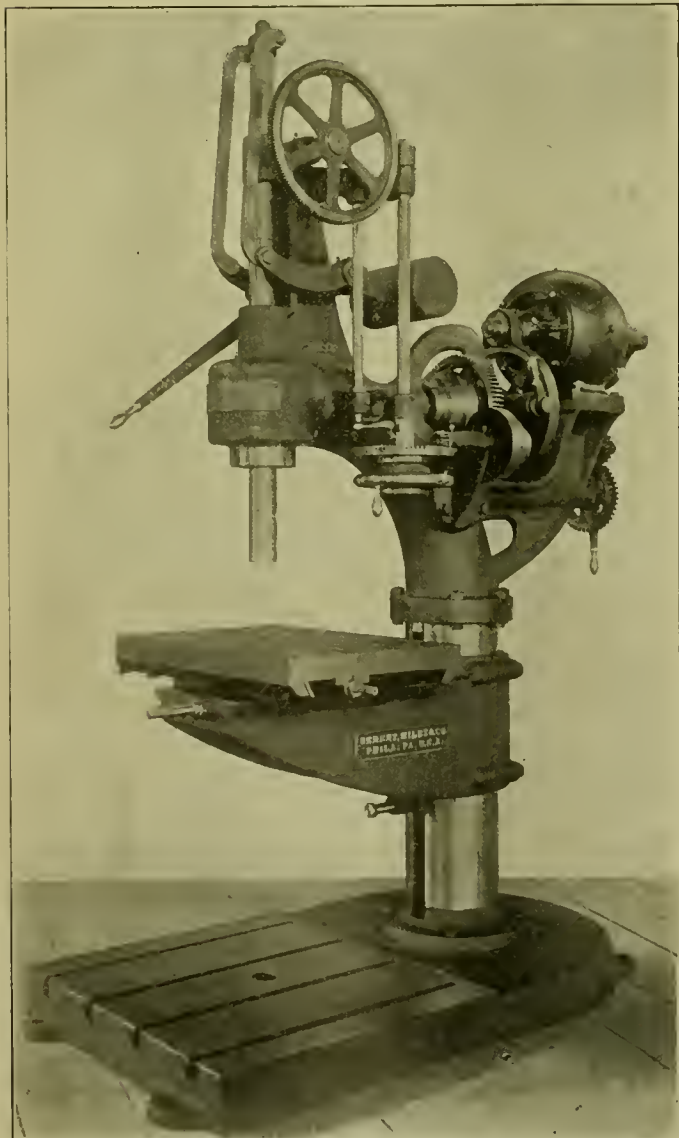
NEAT MOTOR APPLICATION TO BEMENT, MILES & CO. DRILL PRESS.
